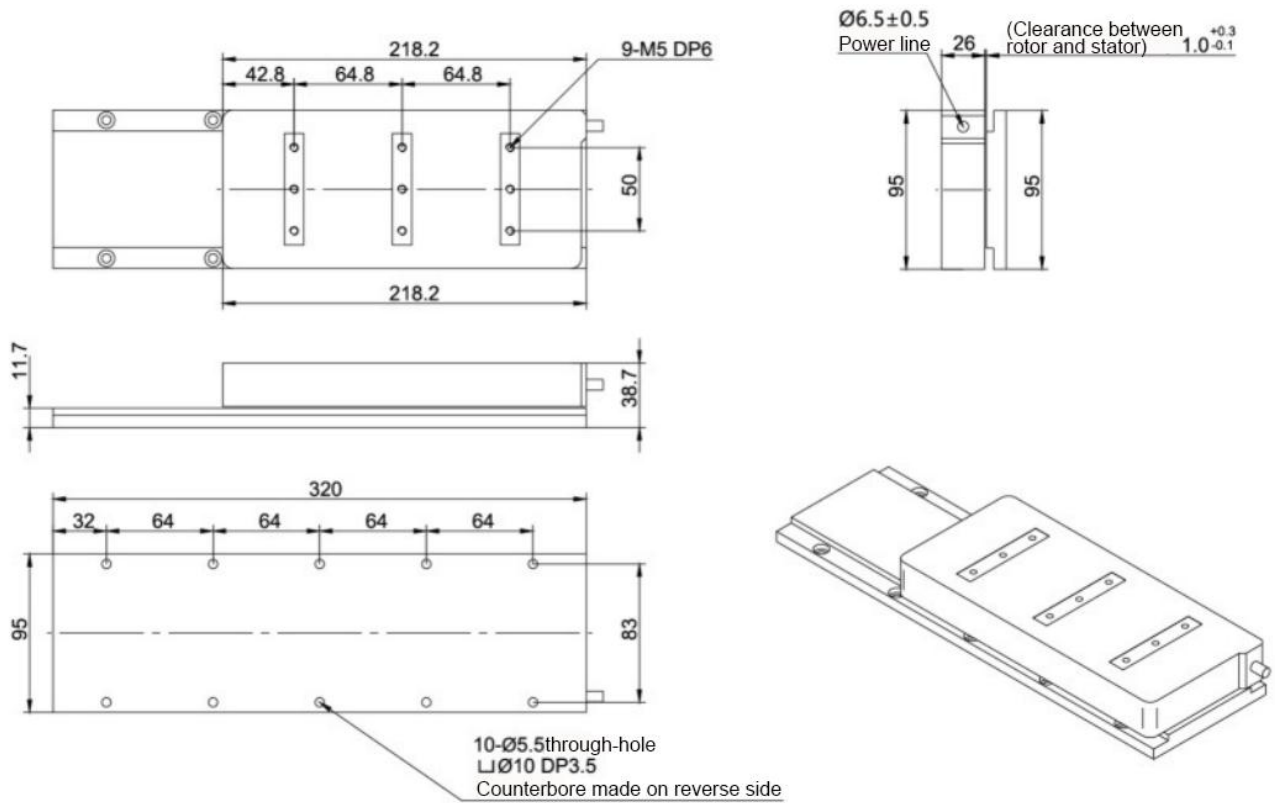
Dimensional drawing of WZCR-AZ95C3-□ motor
